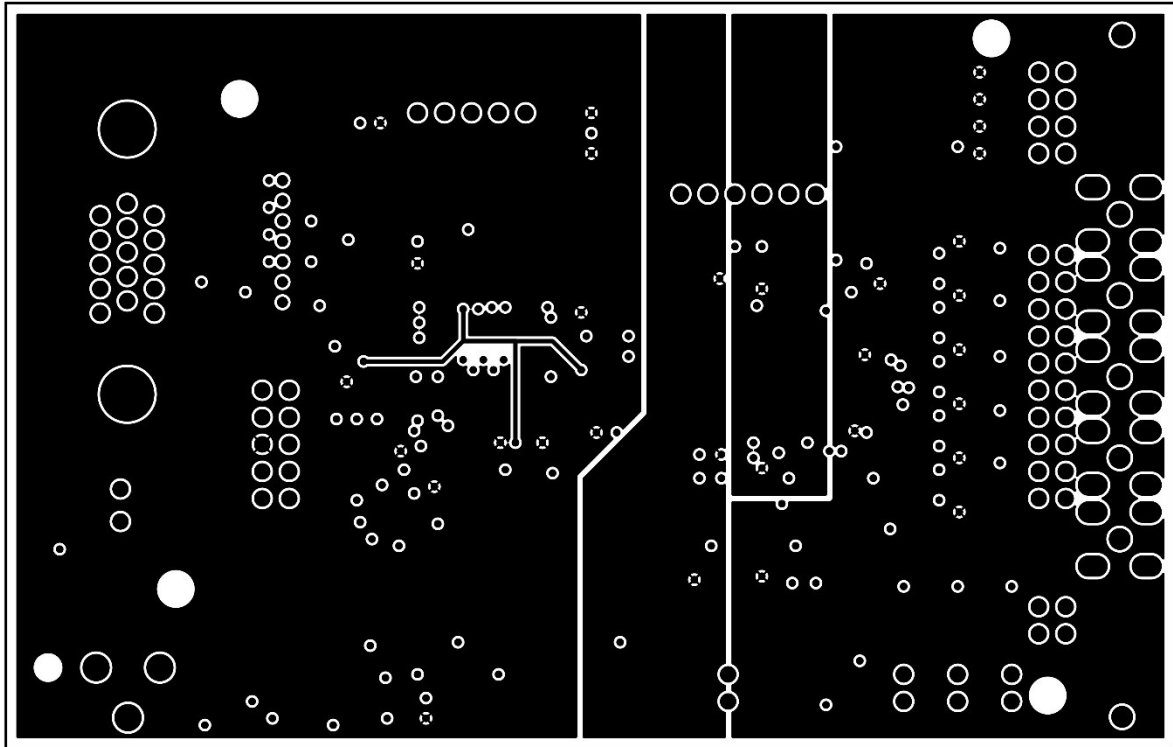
GPX2-EVA BOARD Layout: Bottom layer
